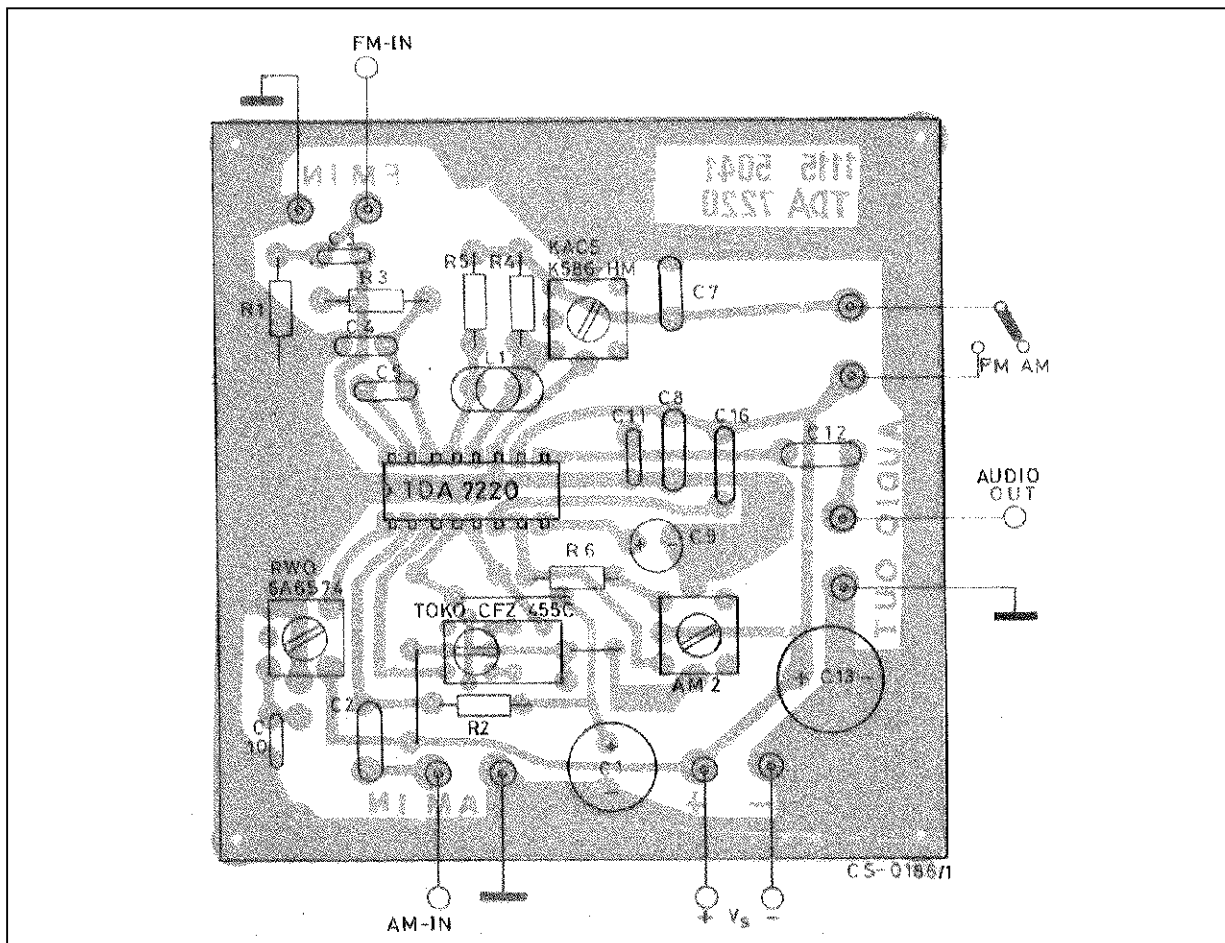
P.C. Board and Component Layout (1:1 scale) of the Test Circuit
